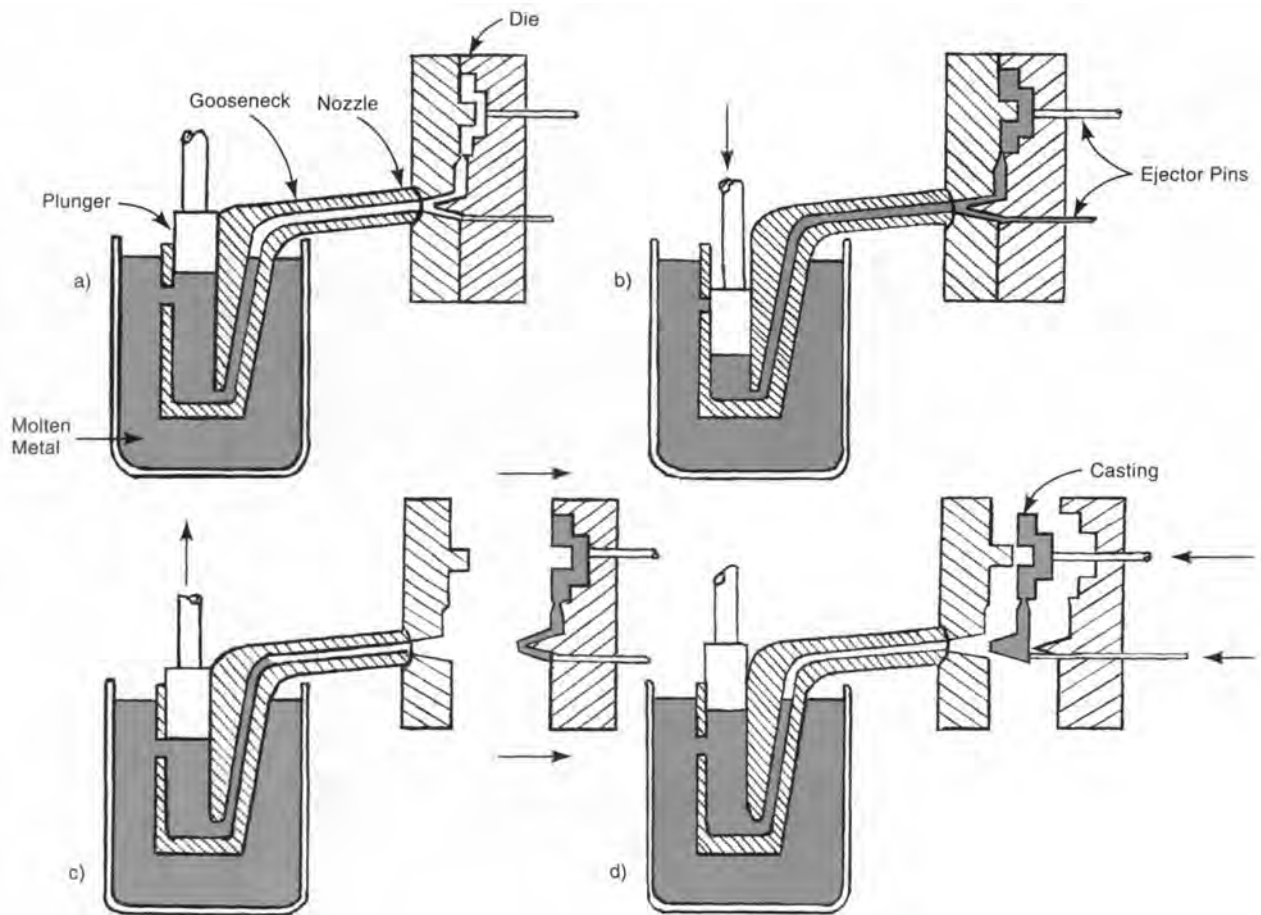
F1 Hot-chamber die-casting. a) The die is closed and the hot chamber (at the gooseneck) is filled with molten metal. b) The plunger descends and forces molten metal through the gooseneck and nozzle and into the die cavity. Metal is held under pressure until it solidifies. c) The die opens. The casting stays in the one half of the die. The plunger retracts, pulling molten metal back through the nozzle and gooseneck. d) Ejector pins push the casting out of the die. As the plunger uncovers the inlet, molten metal refills the hot chamber for the next cycle.
